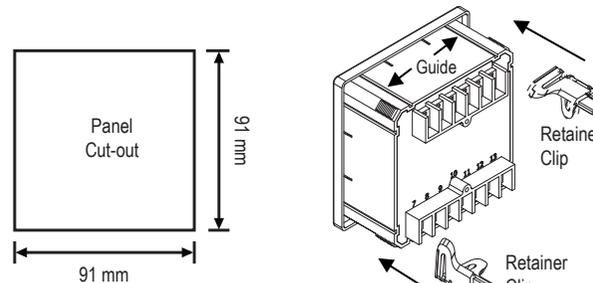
Recommended dimensions of the panel cut-out hole and method for retainer clip installation
